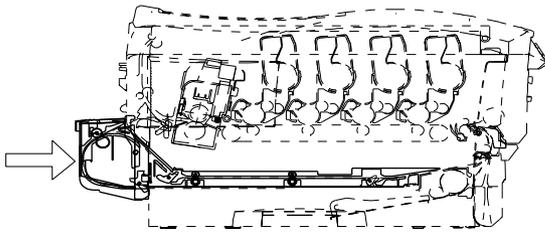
Image of the Printer with the Double-side Printing Unit Mounted
